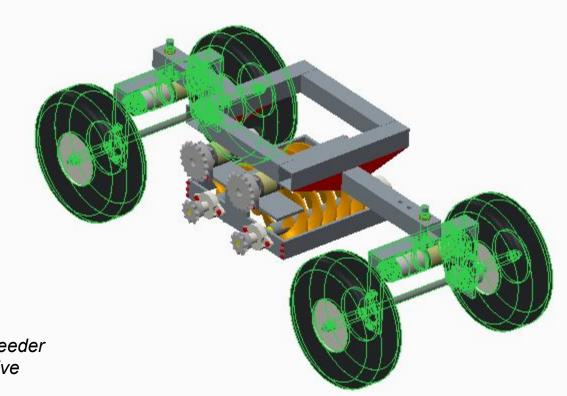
Robo-Weeder with Highlighted Drive Mechanism.
